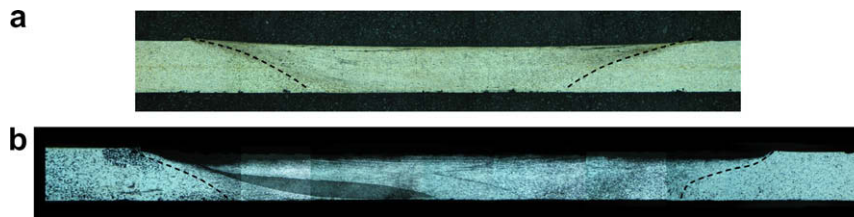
Transverse cross-sections of the HW (a) and CW (b) welds.
